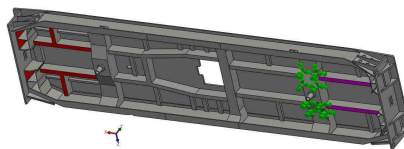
The fixing of the enhanced chassis on two inclined surfaces – variant a
